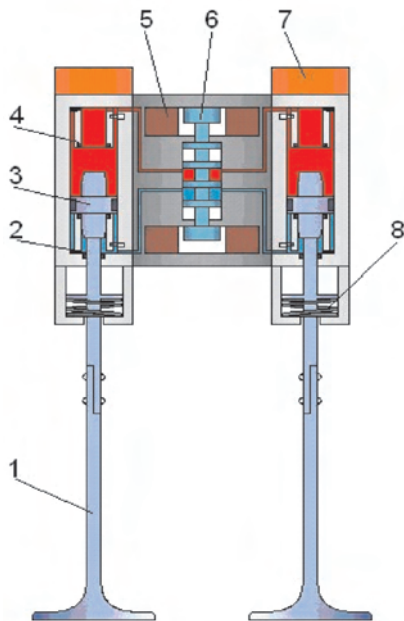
The diagram of the unit consisting of a distributor, servomotor and position sensors: 1 – engine valve, 2 – chamber A, 3 – piston rod, 4 – chamber B, 5 – electromagnet, 6 – distributor slider, 7 – position sensor, 8 – protective spring
